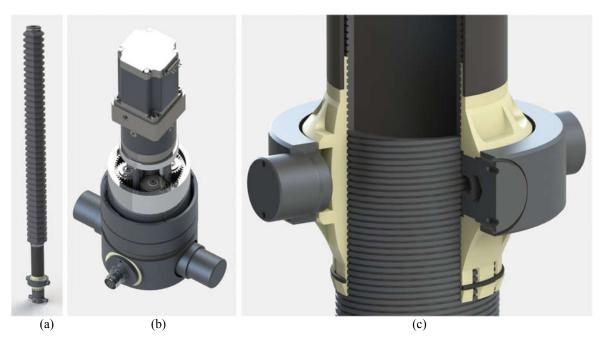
Gear-motor drive unit with gimbal mount (a) and spindle nut with segment scrapers and gimbal mount (b)
